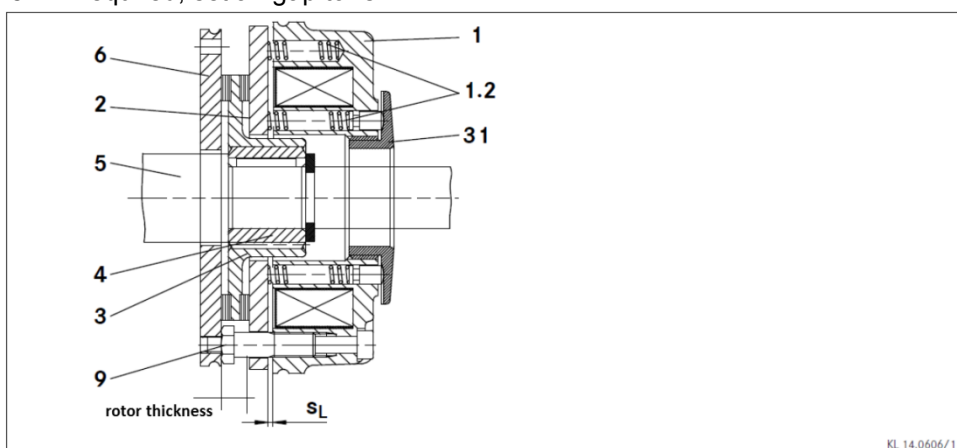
Design of the spring-applied brake INTORQ BFK458: basic module E (complete stator) + rotor + hub + flange
